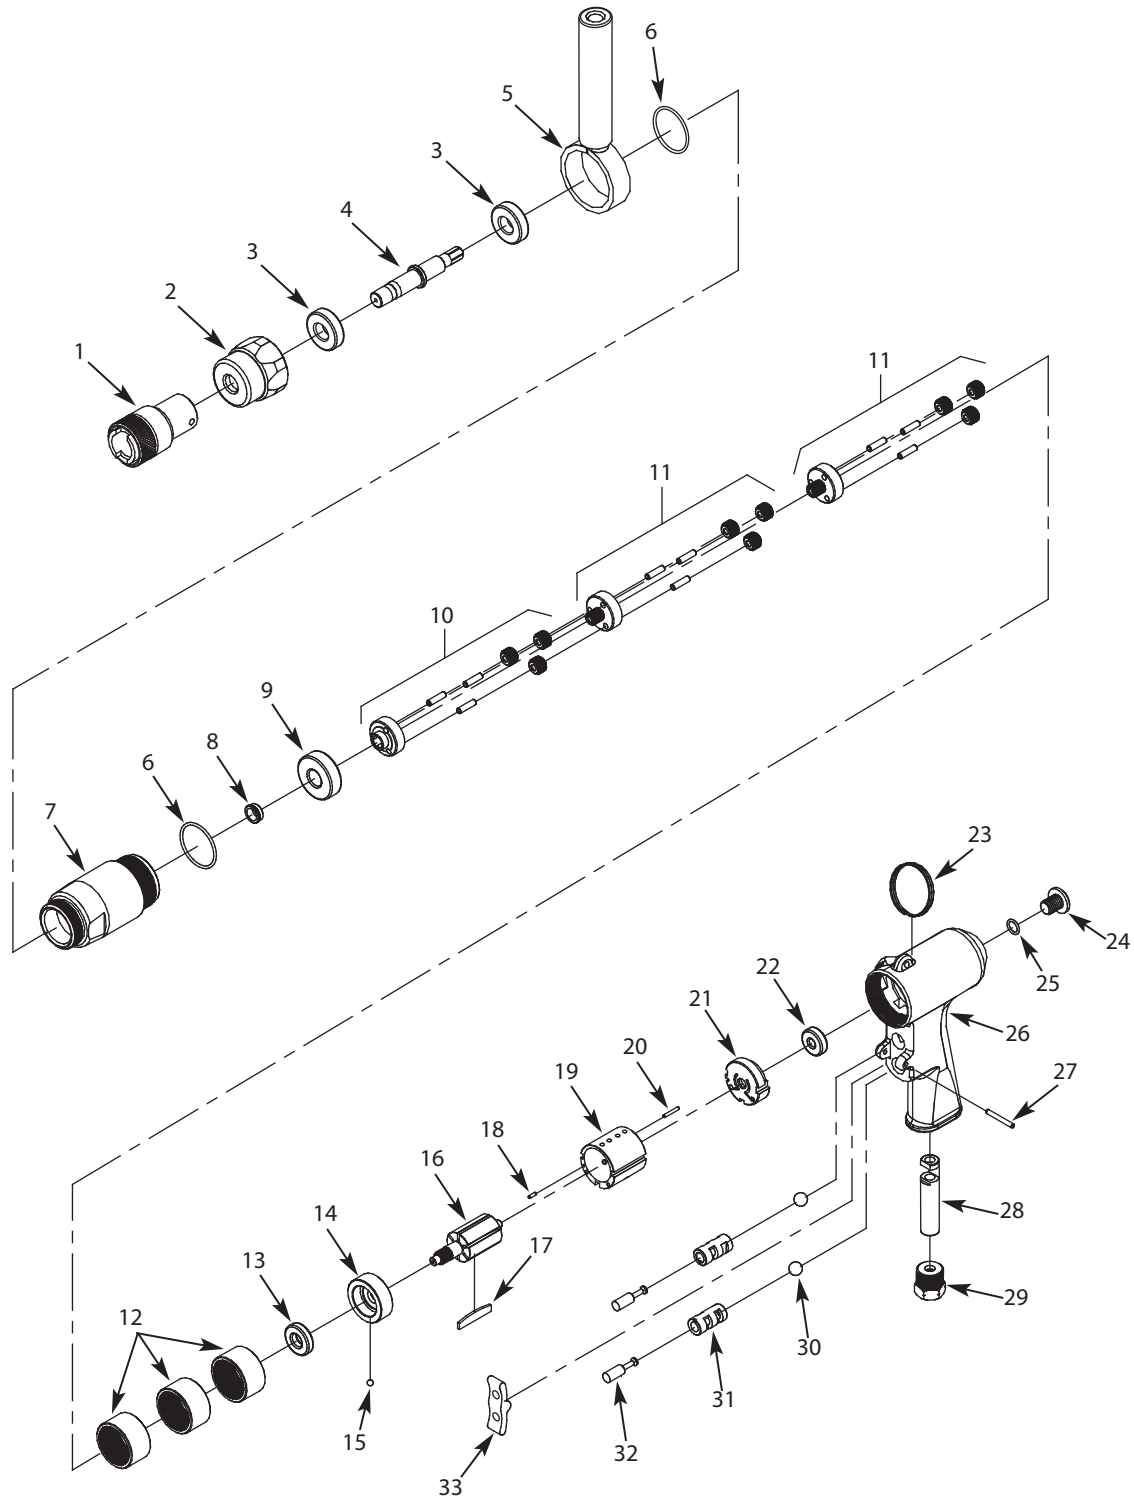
Repair Parts Illustration for Pneumatic Hand Tapper 150 RPM
